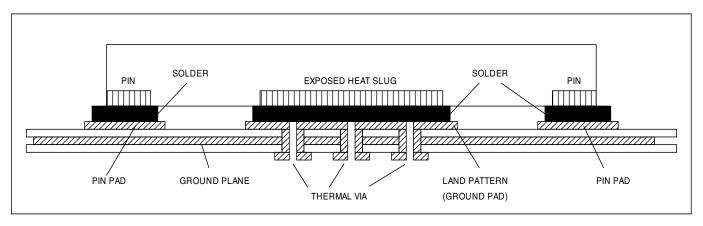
P.C.ASSEMBLY FOR EXPOSED PAD THERMAL RELEASE PATH -SIDE VIEW (DRAWING NOT TO SCALE)
